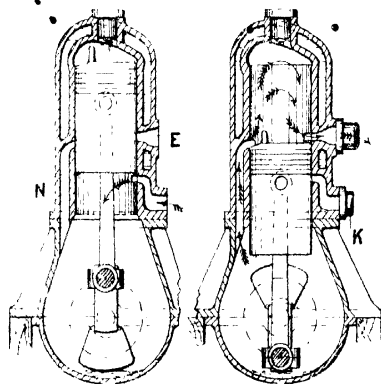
Sectional views of an entirely valveless two-stroke engine, showing the piston in positions for charging, exploding, and exhausting, no inlet valve being required to crank chamber.
